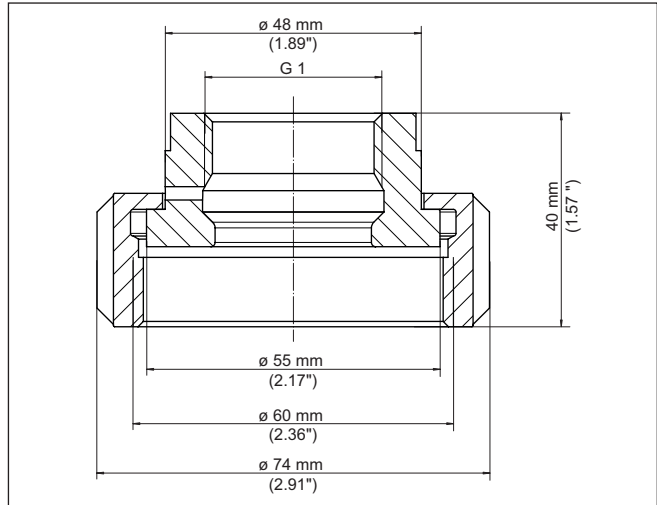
Dimensions hygienic adapter G1 (DIN 3852-X) on SMS DN 38 - O-ring seal
